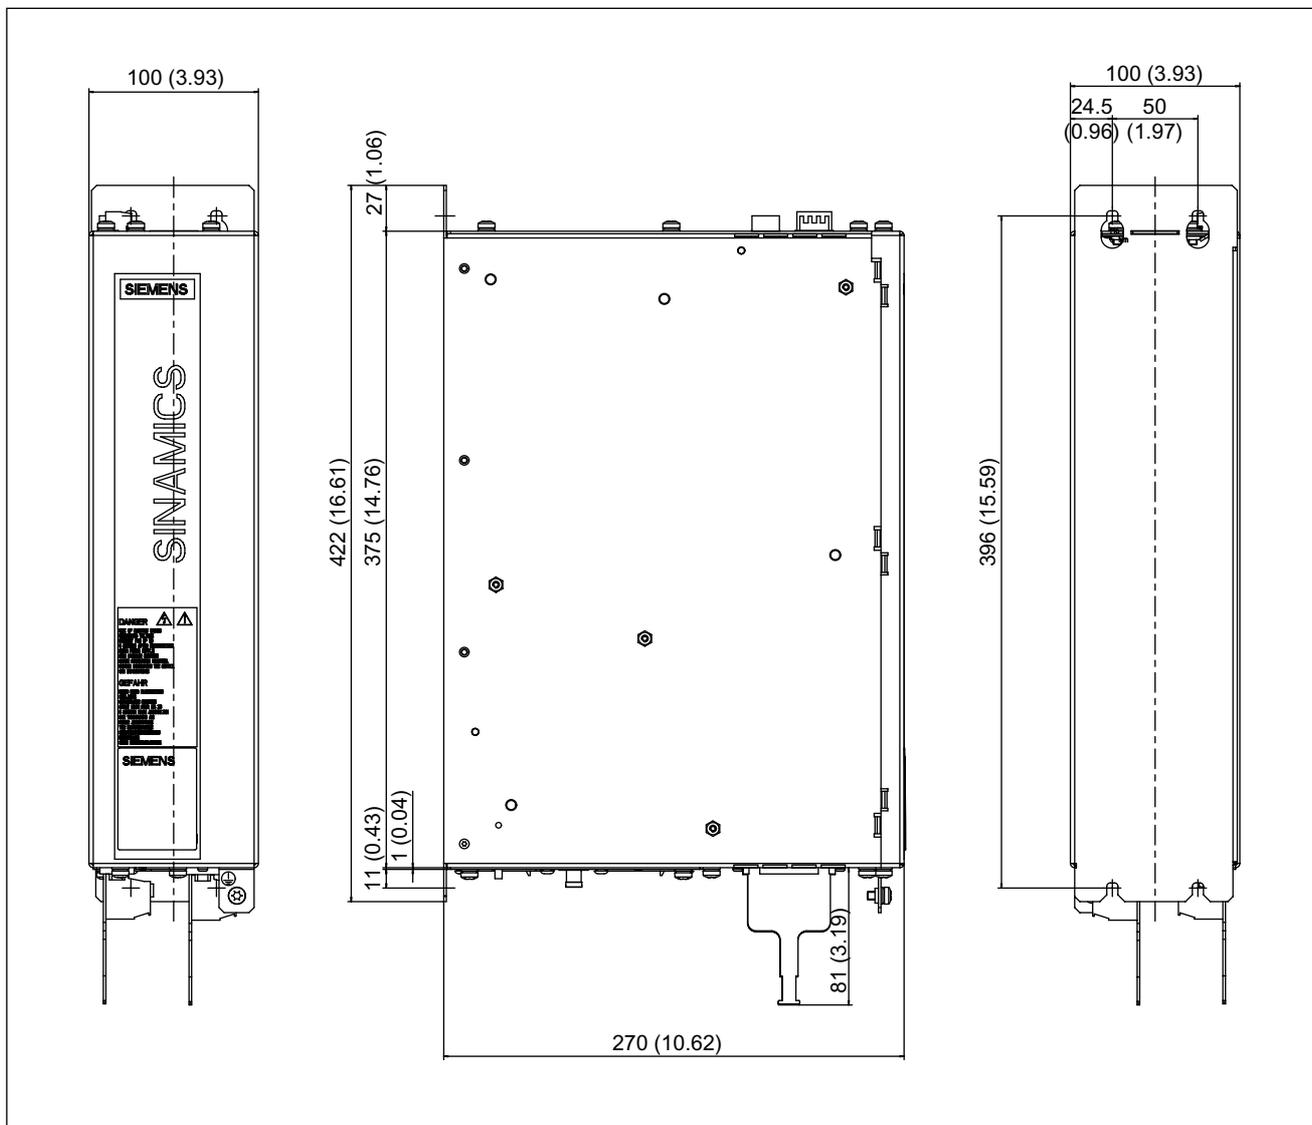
Dimension drawing of Active Interface Module 16 kW, all dimensions in mm and (inches)
